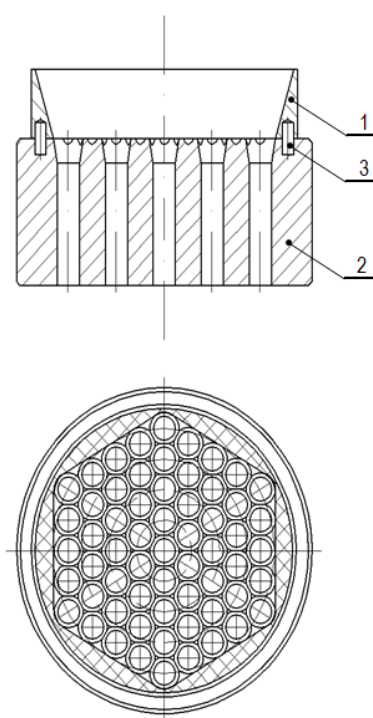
Assembly comprising the multi-channel die plate and compression tube reducer: 1 – compression tube reducer, 2 – multi-channel die plate, 3 – locating pin, SPP – resisting surface (P.419432)
